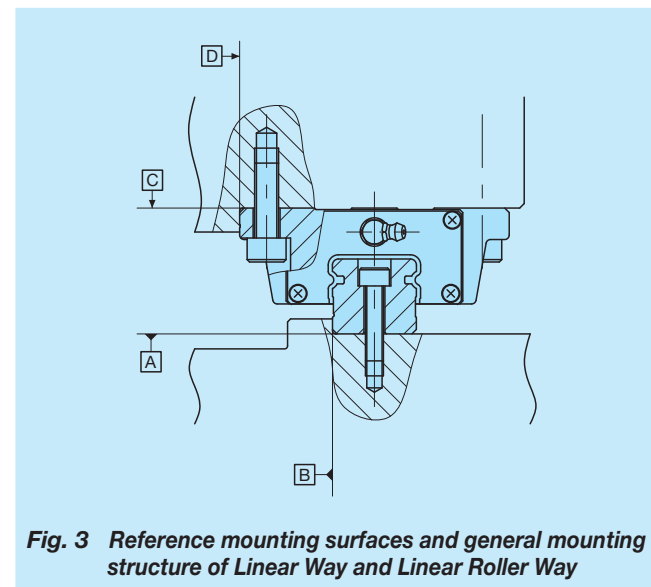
Reference mounting surfaces and general mounting structure of Linear Way and Linear Roller Way
